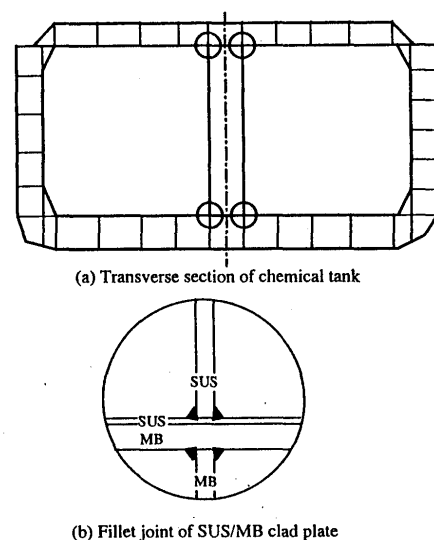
Application of clad plates and welded joints in chemical tanks
